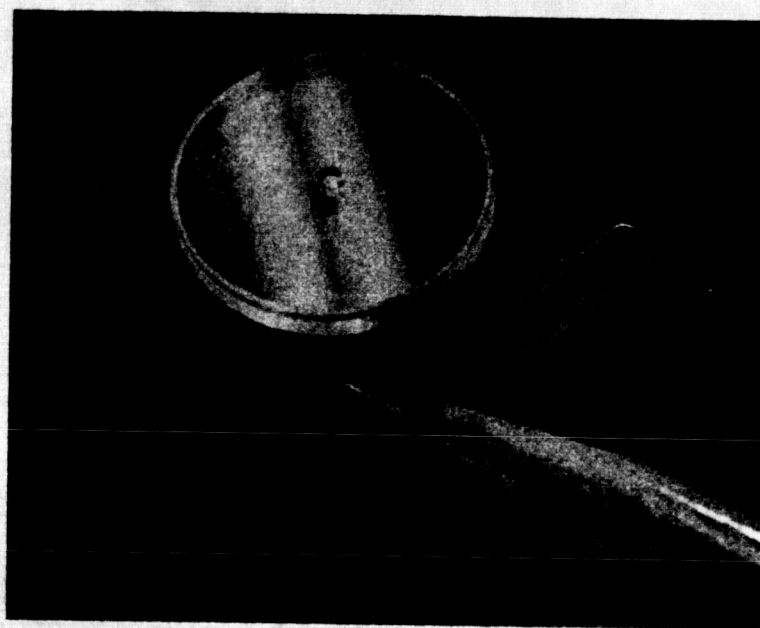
Quartz Blank, Chem-milled Modulator, Prior to Chem-milling Operation. (Machined as per Figure 8A)
